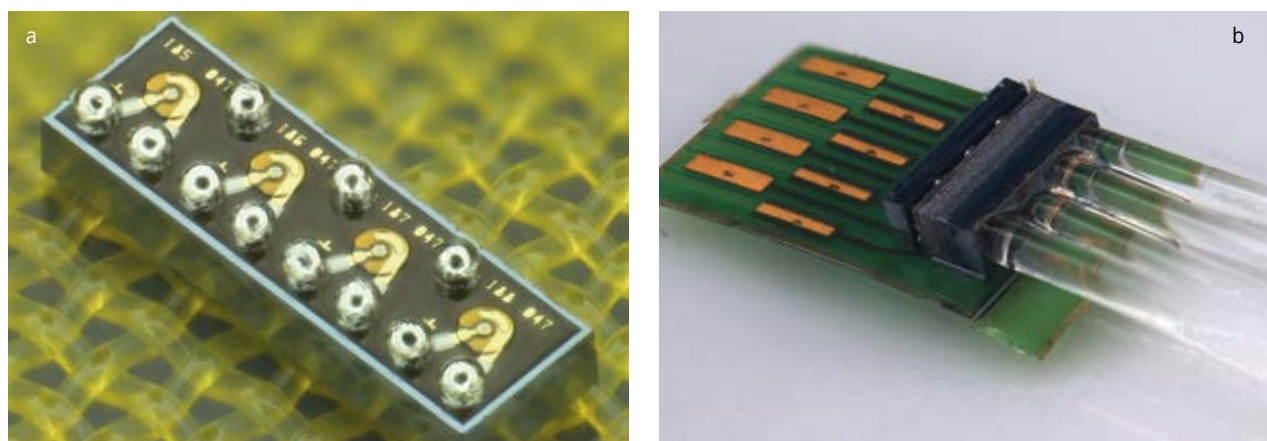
Four-fold VCSEL a) as a bare chip package with re-flowed solder balls and b) 1×4 version of an ODLM with VCSEL interfaced to four fibers and electrically connected to a flexible PCB board using the MEMS interposer
